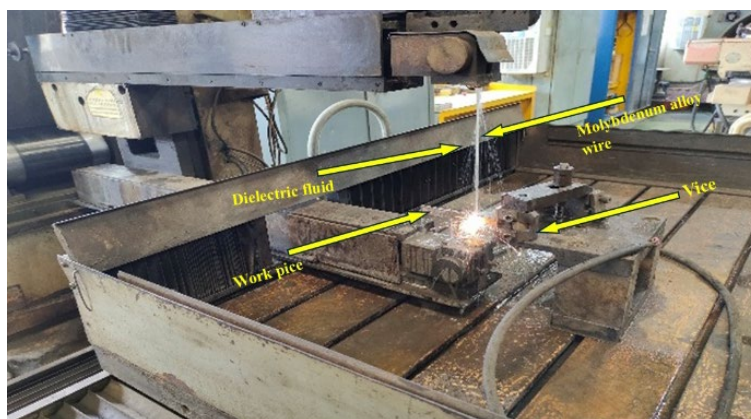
Experimental Setup and machining using BOMA DK7780D wire-EDM
